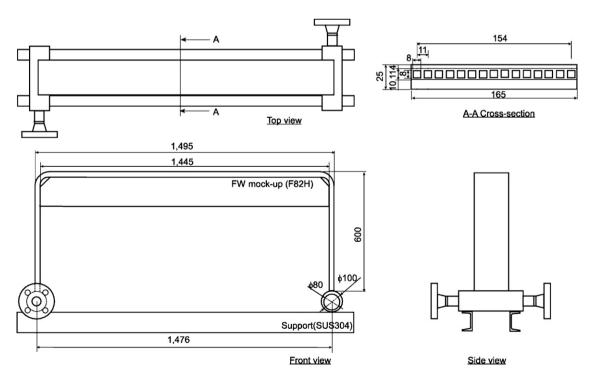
Schematic drawing of full-scale First Wall mock-up.
